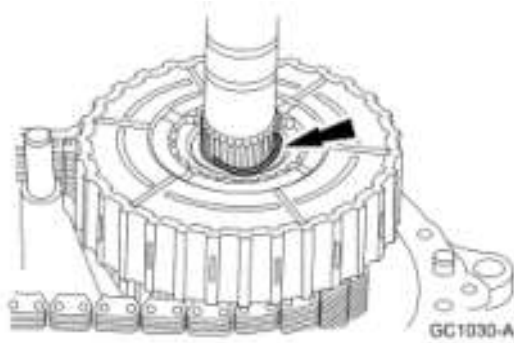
Locating Clutch Pack Assembly & Snap Ring
